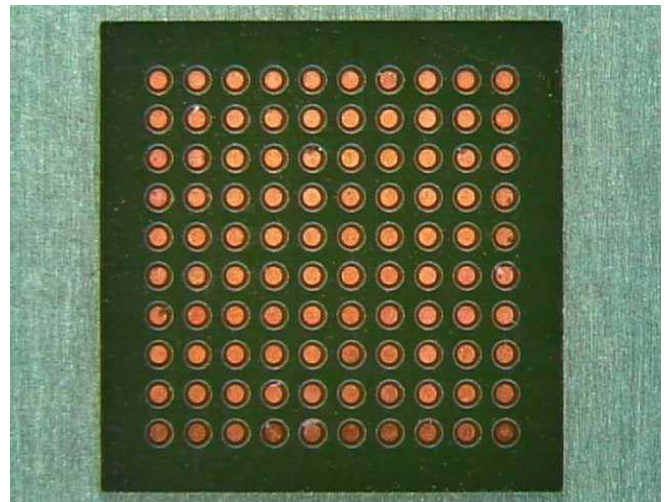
0.4mm Pitch Pad Design with 0.20mm Pads (8mils) & 0.20mm (8mils) Spacing
